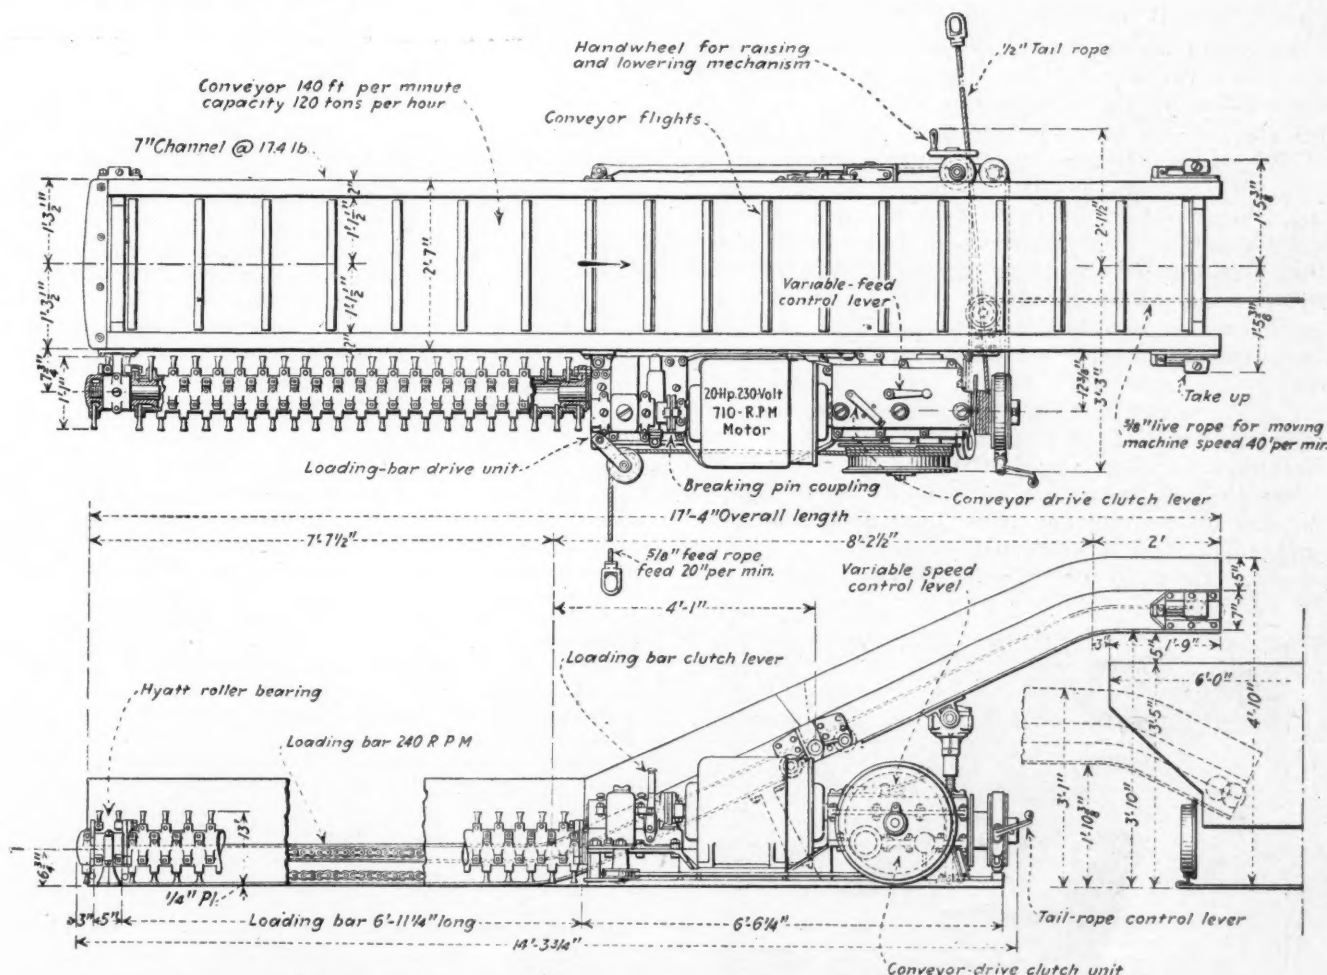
PLAN AND ELEVATION OF LOADER AT WORK AT BUFFALO EAGLE COLLIERY CO., BRAEHOLM, W. VA.
